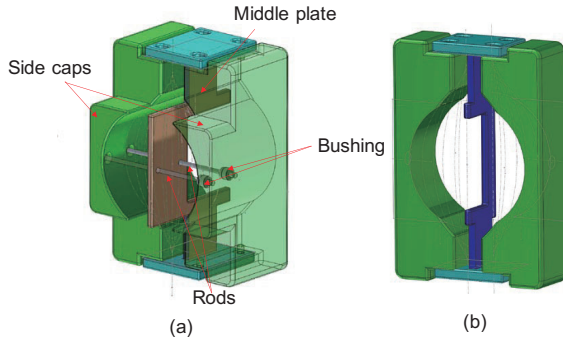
End fixtures. (a) End fixture for the fixed end. (b) End fixture for the free end.
